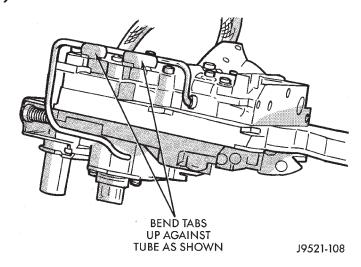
Securing Boost Valve Tube With Brace Tabs
